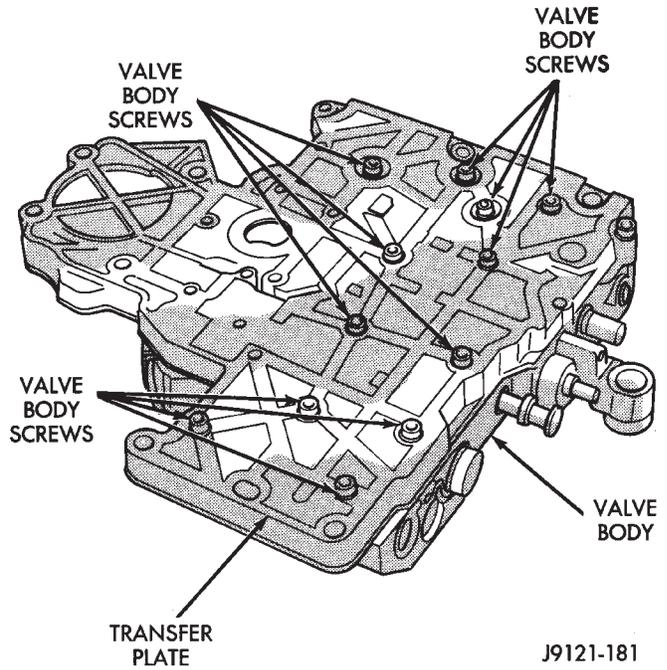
Valve Body-To-Transfer Plate Screw Locations
